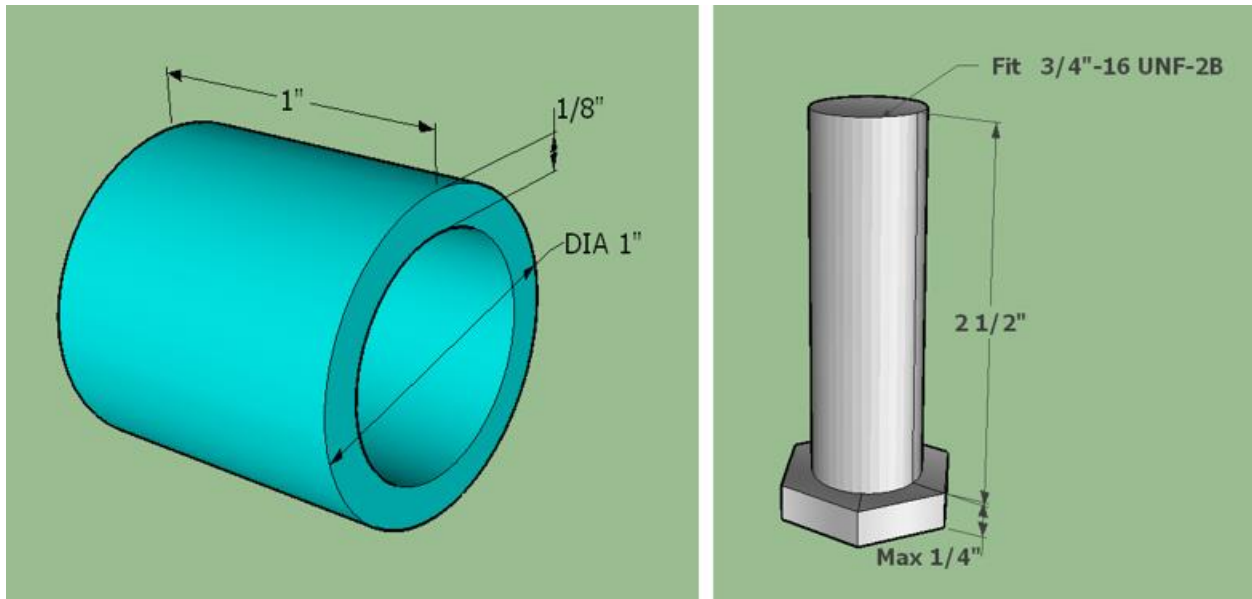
Extension cylinders and Bolts of the Bracket Plate - Steel.
